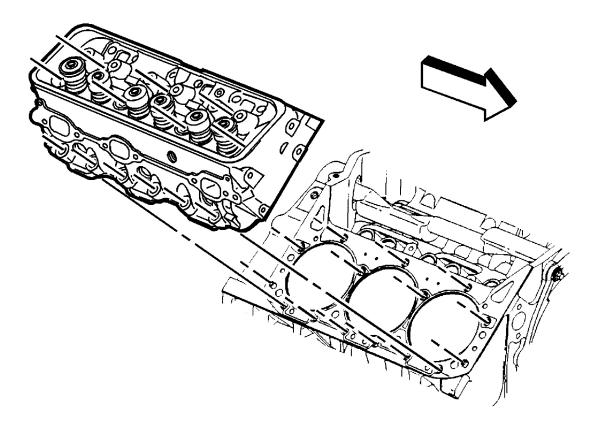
Removing/Installing Cylinder Head (Right) Courtesy of GENERAL MOTORS CORP.
